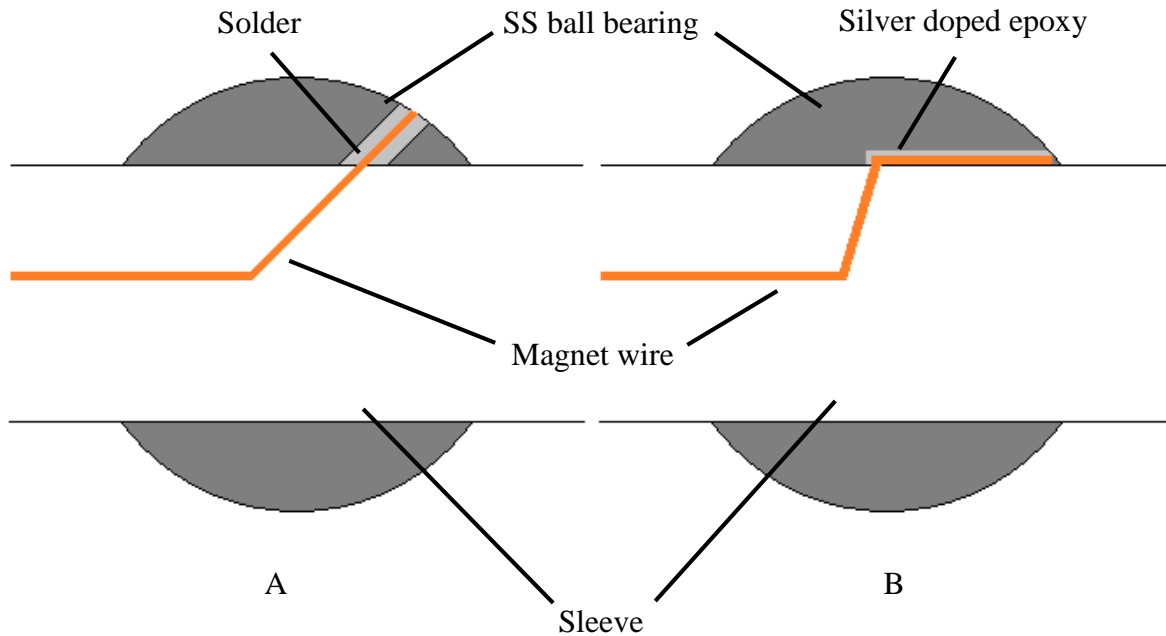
Illustration of soldering technique (A) and silver doped epoxy technique (B) for connecting magnet wires to the SS sensing, excitation and ground elements.
